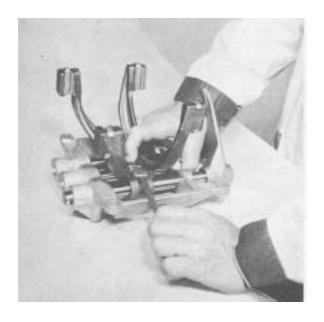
Install 1st & reverse lug lockscrew and lockwire to prevent loosening.
